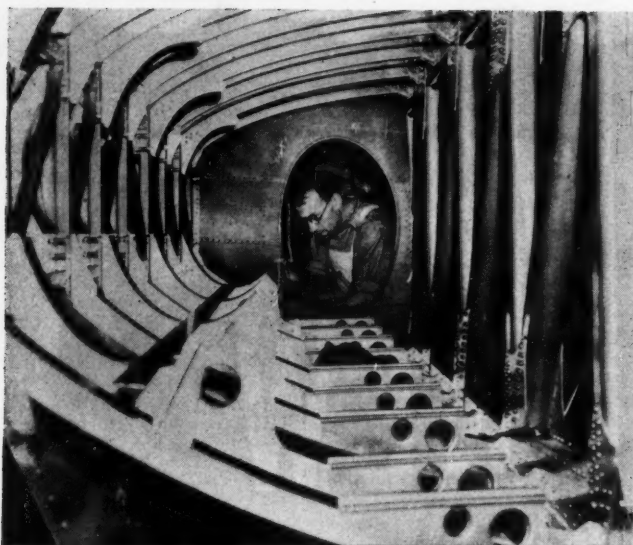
Interior view of outer wing panel of a plane. Extruded shapes are 75S aluminum and sheet is 24S
